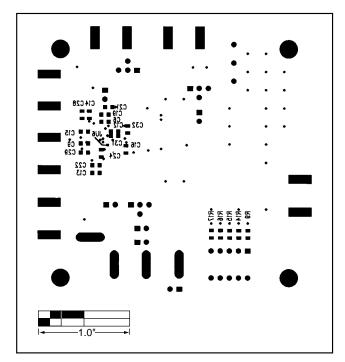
MAX2424/MAX2426 EV Kits PC Board Layout— Bottom Silkscreen
